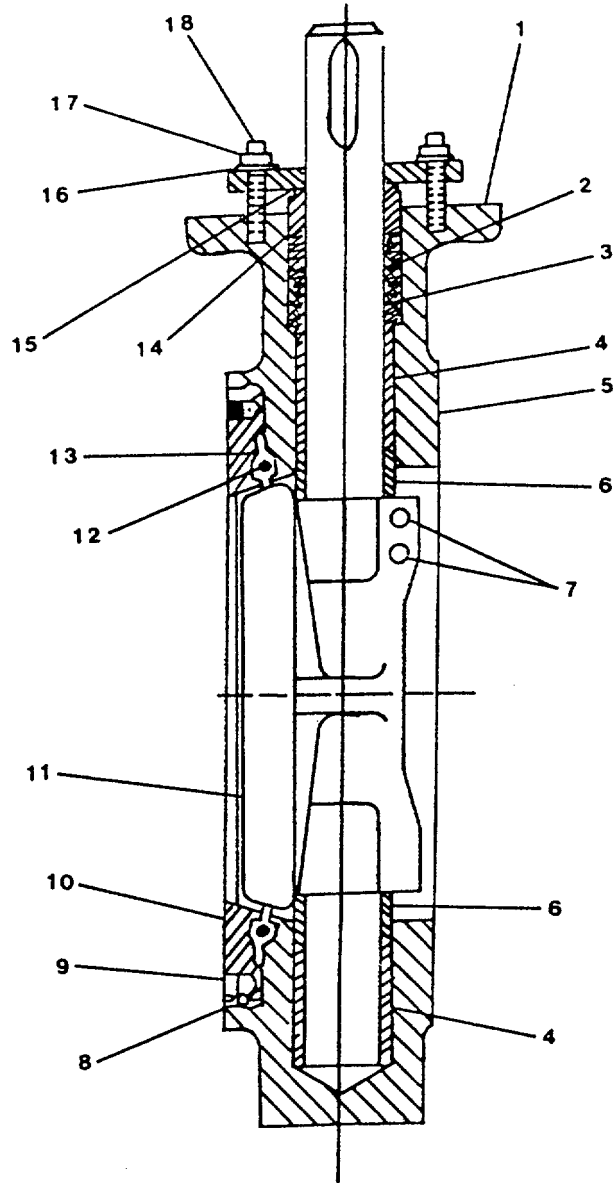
VALVE, BUTTERFLY, GEAR OPERATED 12-ILA-222-TTG-30D
